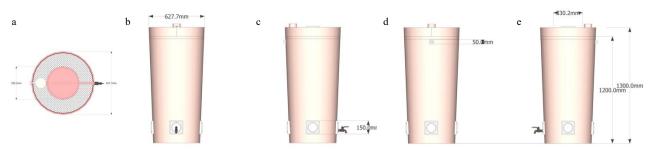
a) Plan; b) front elevation; c) right elevation; d) rear elevation; e) left elevation
